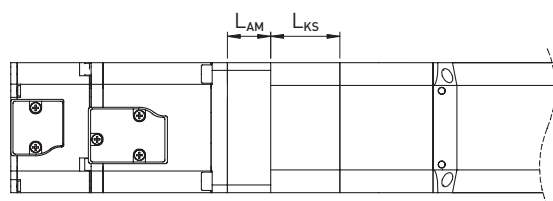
Motor connection of linear modules HM-S without belt drive
